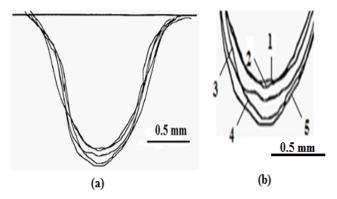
(a) Typical variations in weld pool cross-section along the length of a single weld (b) Five weld pool cross sections
